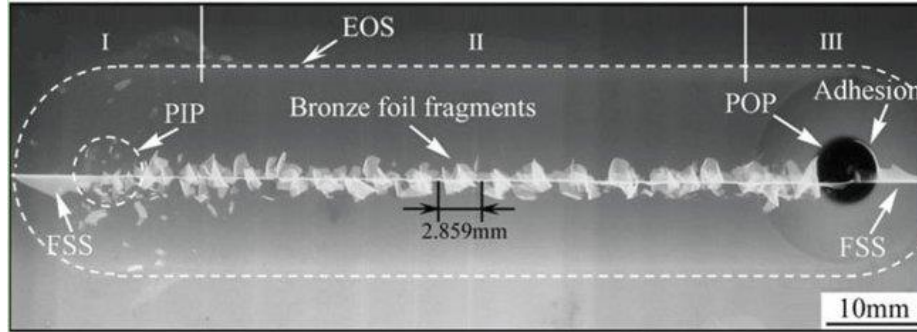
X-ray photograph of the FSW joint with inserting bronze foil as a marker (I: plunging phase, II: welding phase, III: pulling-out phase, EOS: edge of the shoulder, FSS: fan-shaped structure, PIP: pin insert position, POP: pull-out position. ([Li et al., 2013](#))
